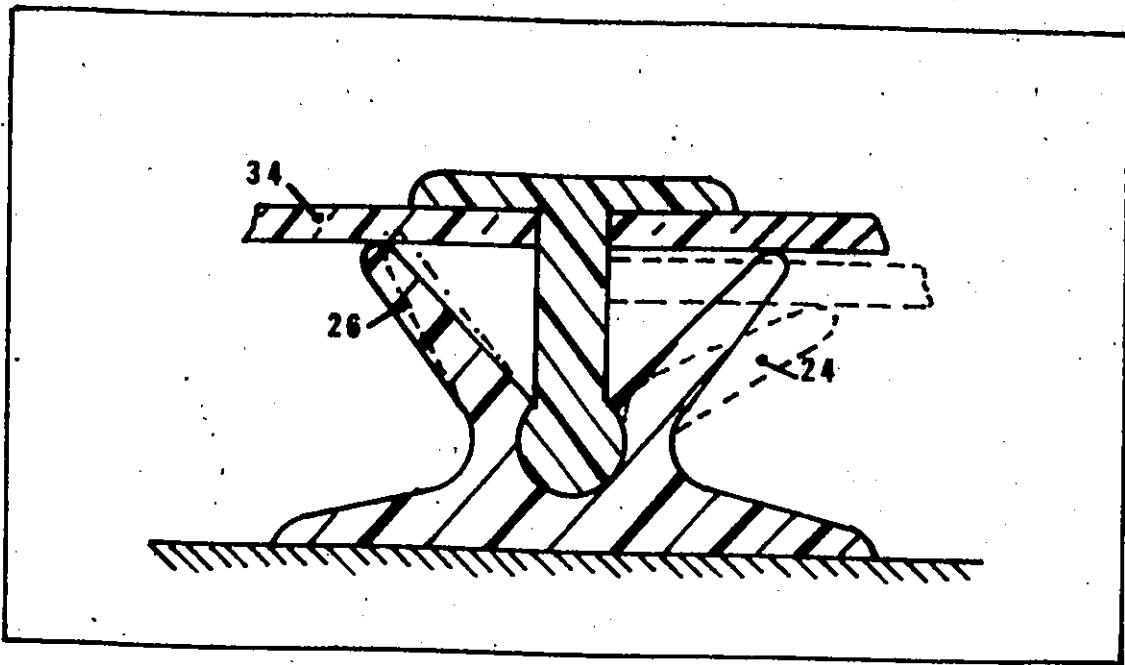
,5 WALL FIXING CONNECTOR BY LOGAN.
